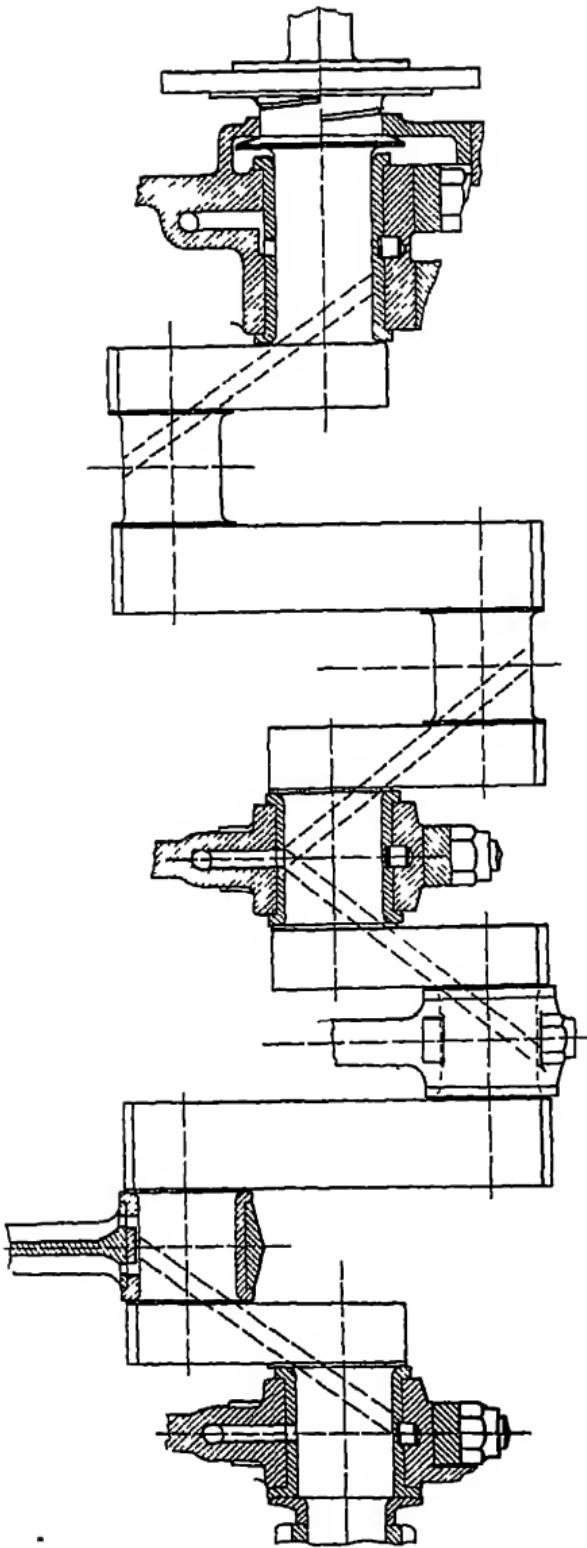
THE BEARING ARRANGEMENT ON A TYPICAL FOUR-THROW CRANKSHAFT
